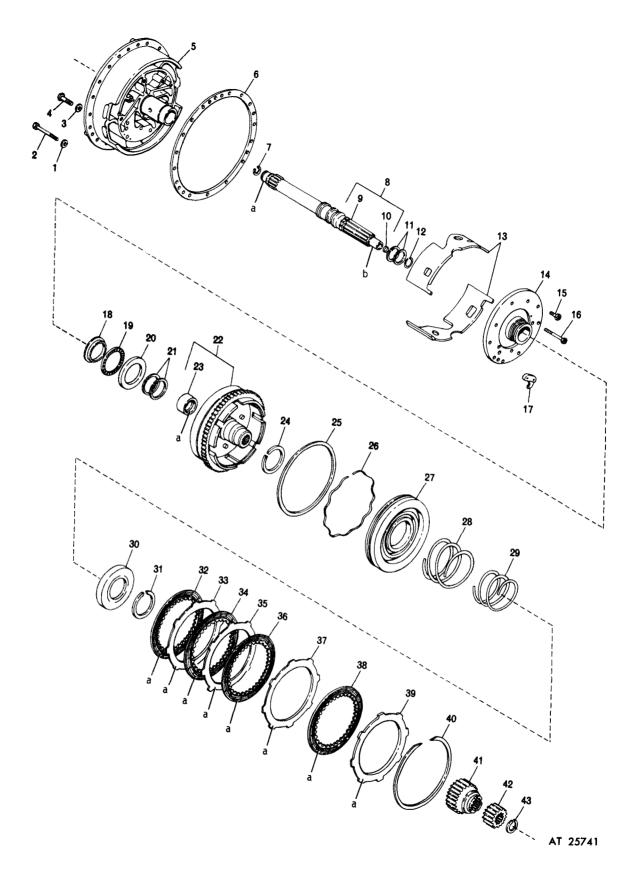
Diaphragm assembly, turbine shaft, and high-range clutch-exploded view.
